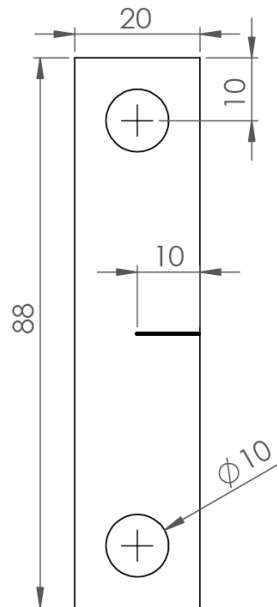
The test specimen containing an edge crack (dimensions in mm, thickness: 8mm).
